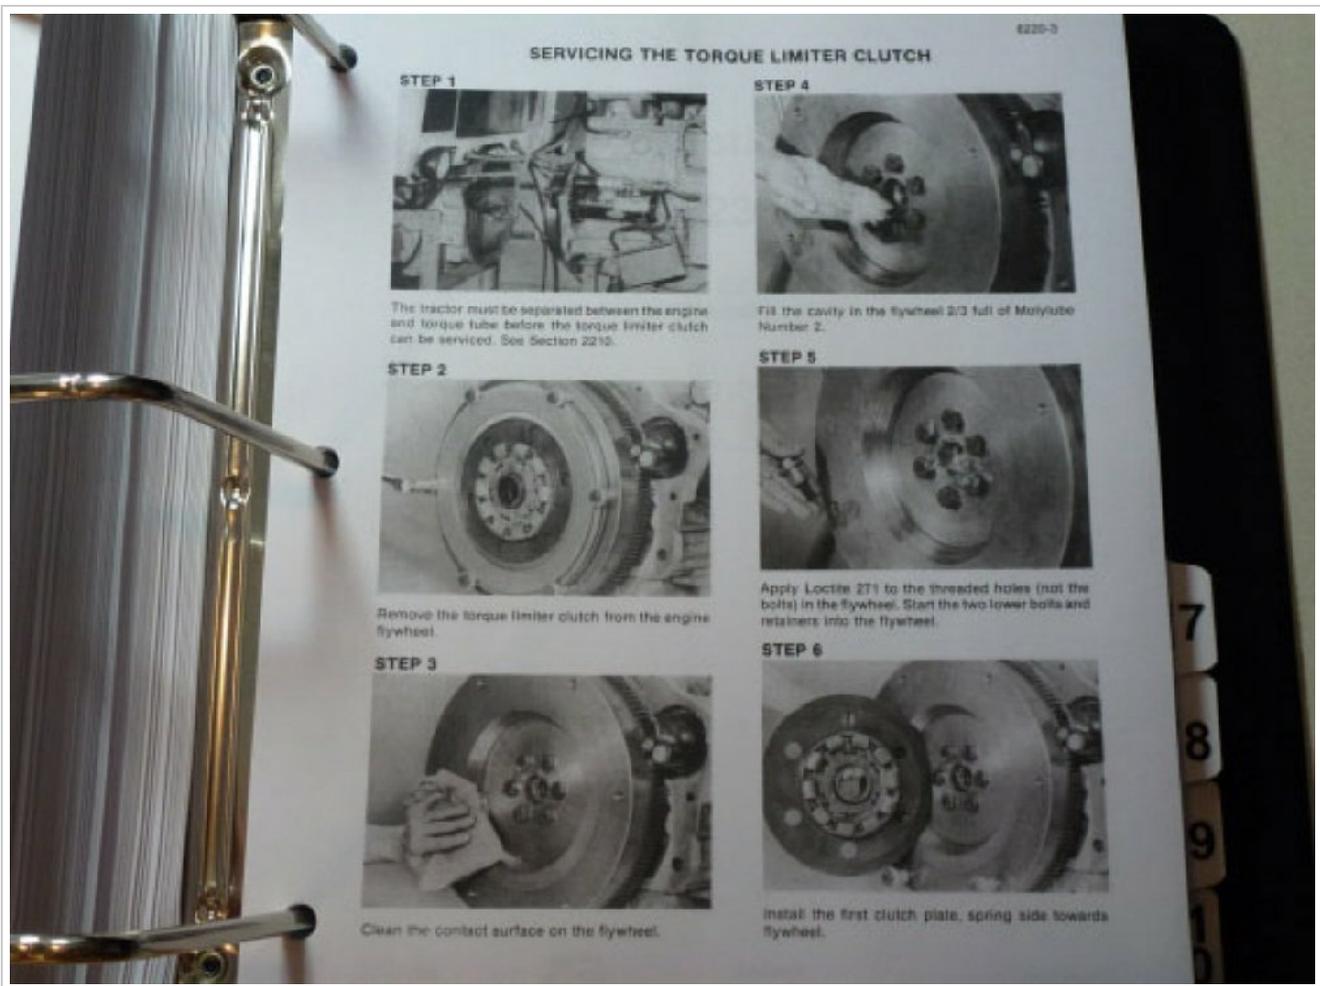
Torque Limiter Clutch Service Steps. This image illustrates a six-step process for servicing the torque limiter clutch, showing visual cues for each stage of disassembly, cleaning, lubrication, and reassembly.
